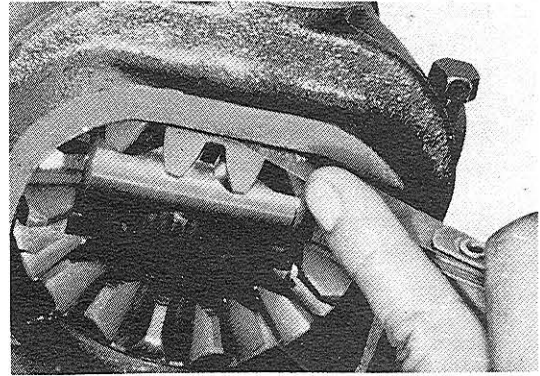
Measuring Side V5097 Gear Thrust Clearance
